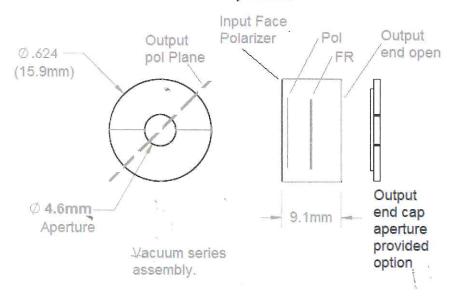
Faraday rotator with single polarizer Assembly. ISO-5-1550-AP1-SS
